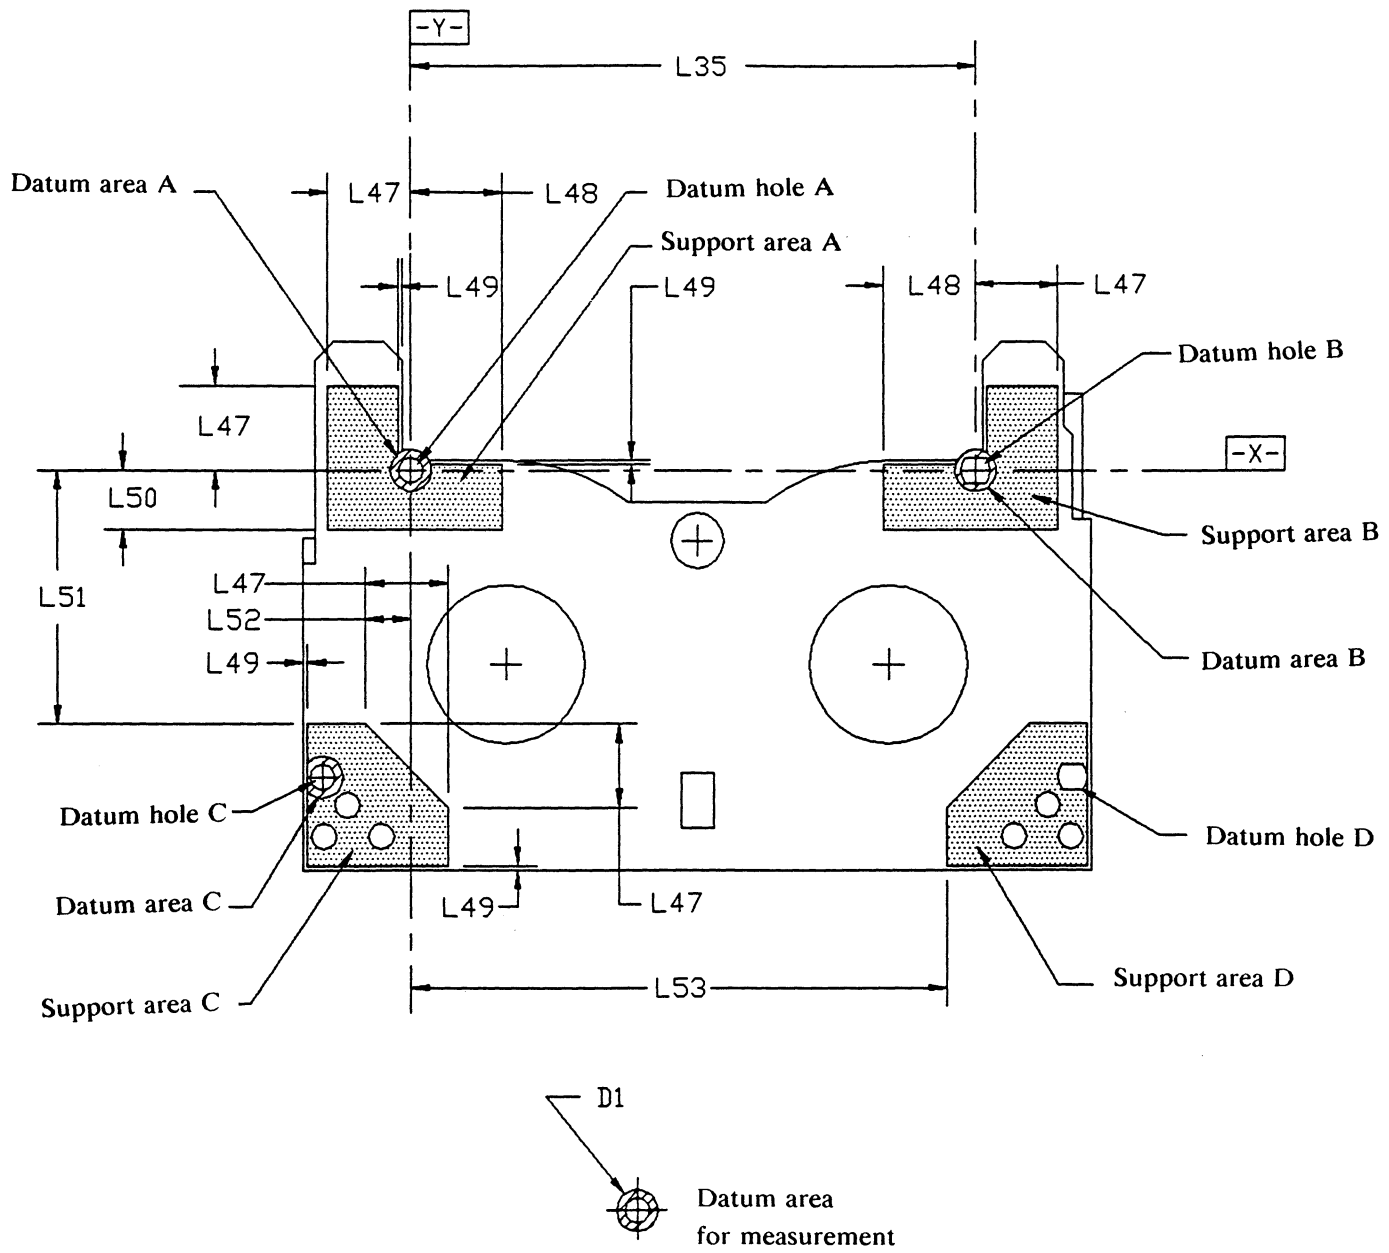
Bottom Side, Datum and Support Areas
